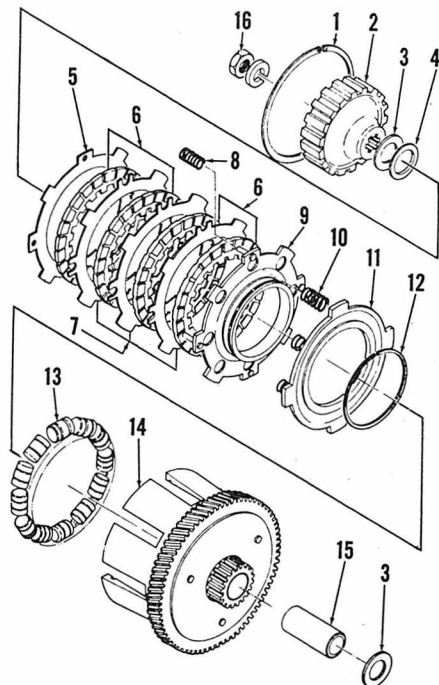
Exploded view of the automatic clutch used on MF-3 and U-5 models.
